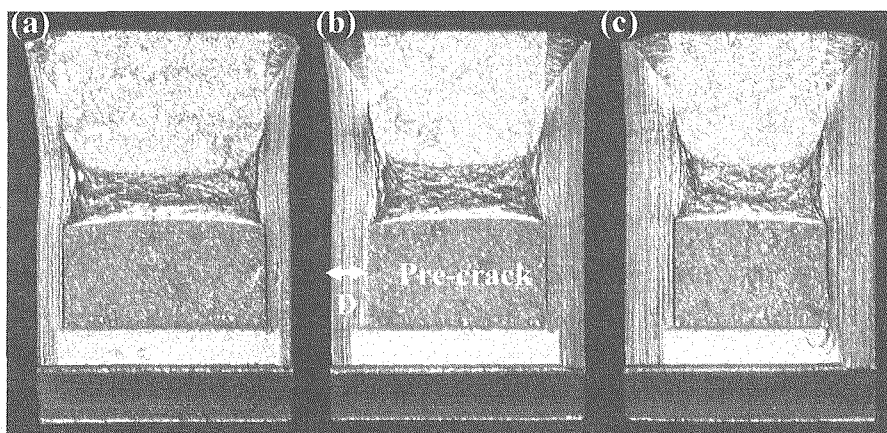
Fracture surfaces for 3PB specimens (type 3: $W = 5.0$ mm, $B = 3.3$ mm) with different depths of side groove.
